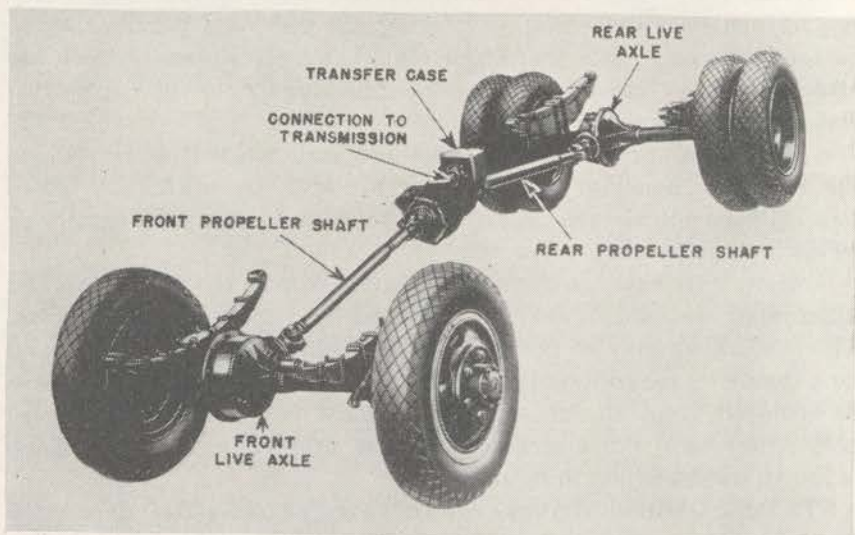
Arrangement of transfer case, propeller shafts, universal joints, and live axles for four-wheel drive.
